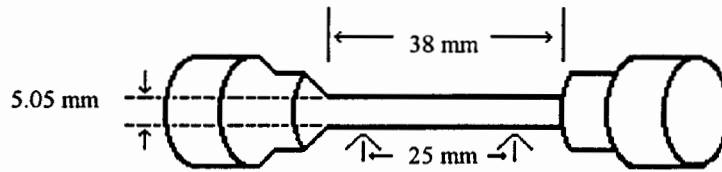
Drawing of the Hounsfield round tensile specimens used for uni-axial tensile tests on Ti-25Al-10Nb-3V-1Mo (at.%) and 304 stainless steel. The gauge length was 25 mm and the length of the total reduced section was 38 mm. The specimen diameter was 5.05 mm.
